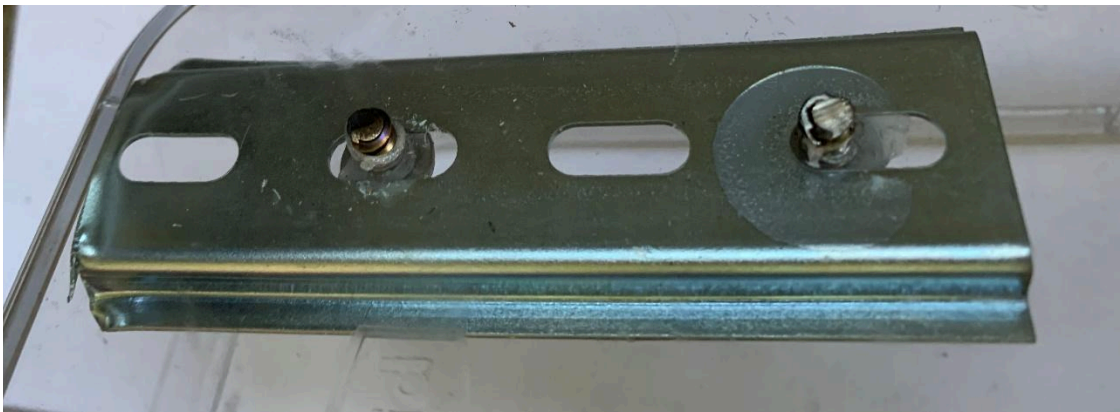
Example of the screws shaved down with a metal grinder to remove sharp points.
